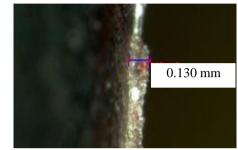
Biggest Burry dimension at material 0.6 mm
